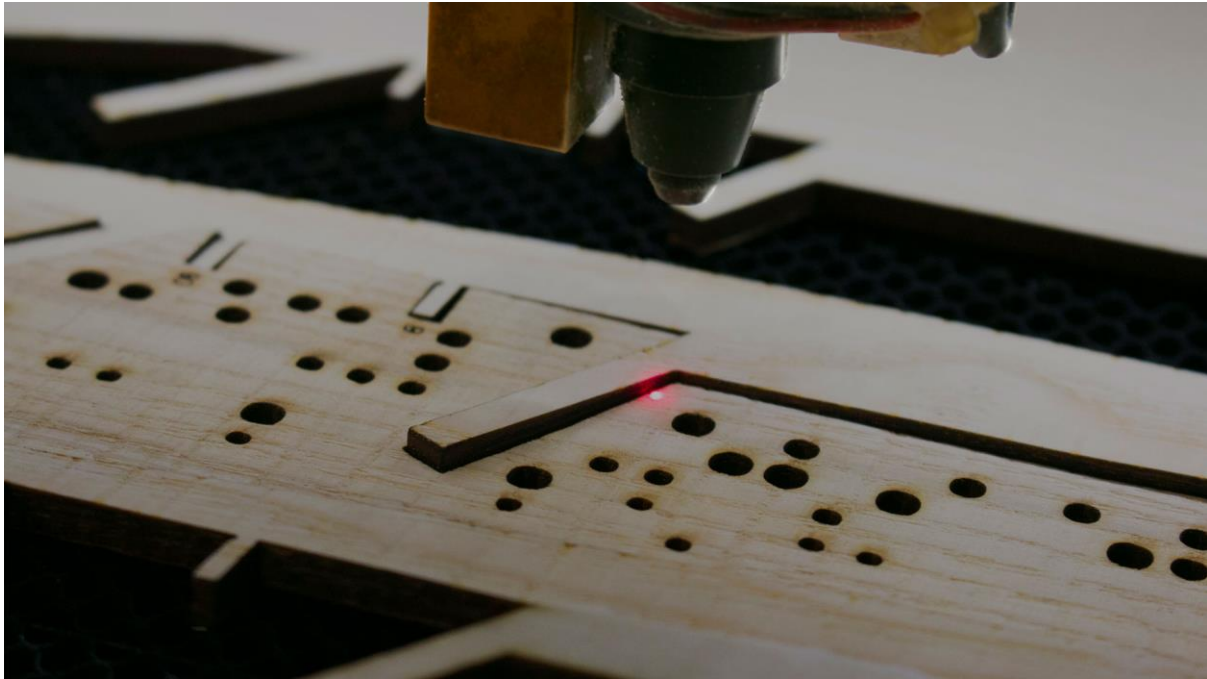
laser cutting of MDF to make Arm and Chassis parts.
